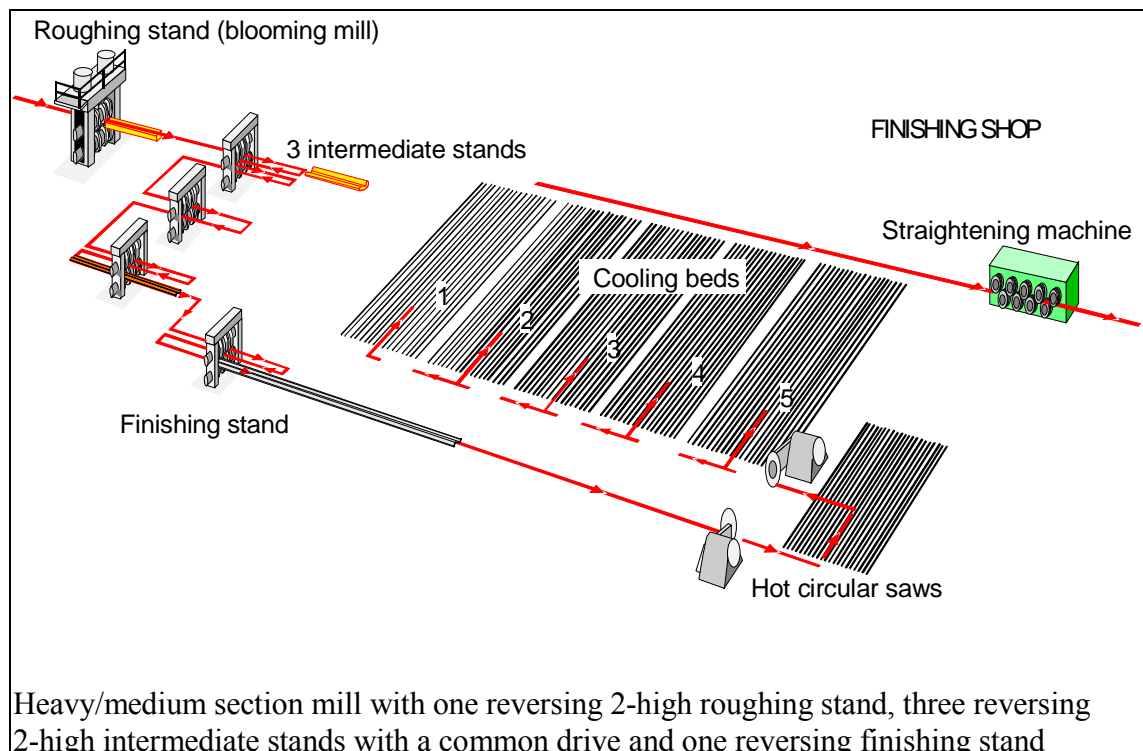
Plant layout of a Heavy/Medium Section Mill for sheet piling
